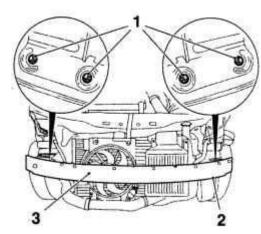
Bolts fixing the front bumper beam: 1 - bolts, 2 - place the fluid retention reservoir for washing of glasses, 3 - the front bumper beam
